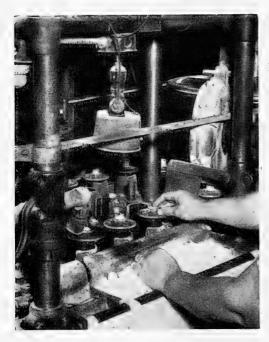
Facing and drilling pearl buttons with Barry machine.
